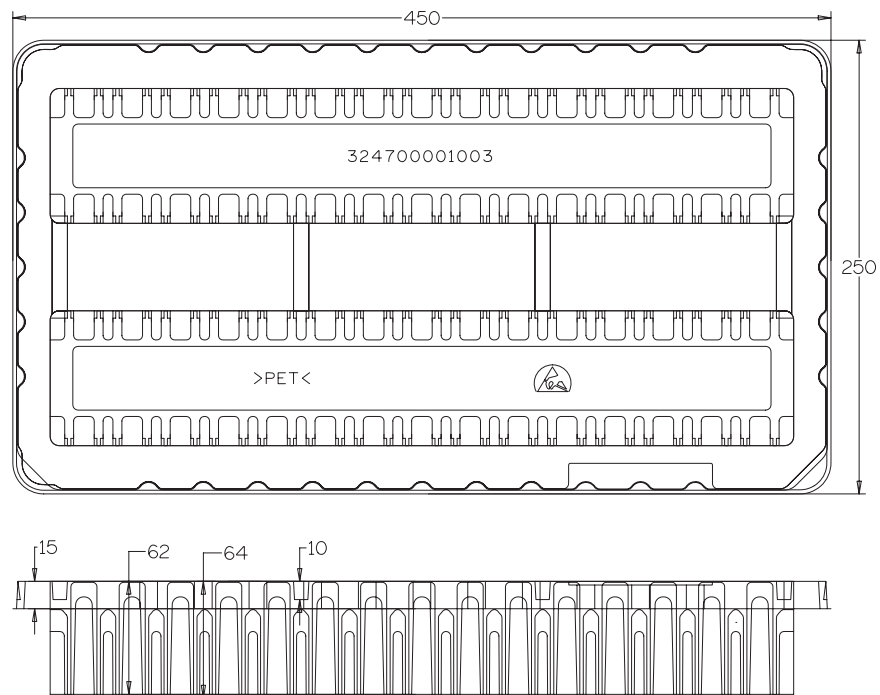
Tray dimensions for L2M0-xxxx004MC2200.
